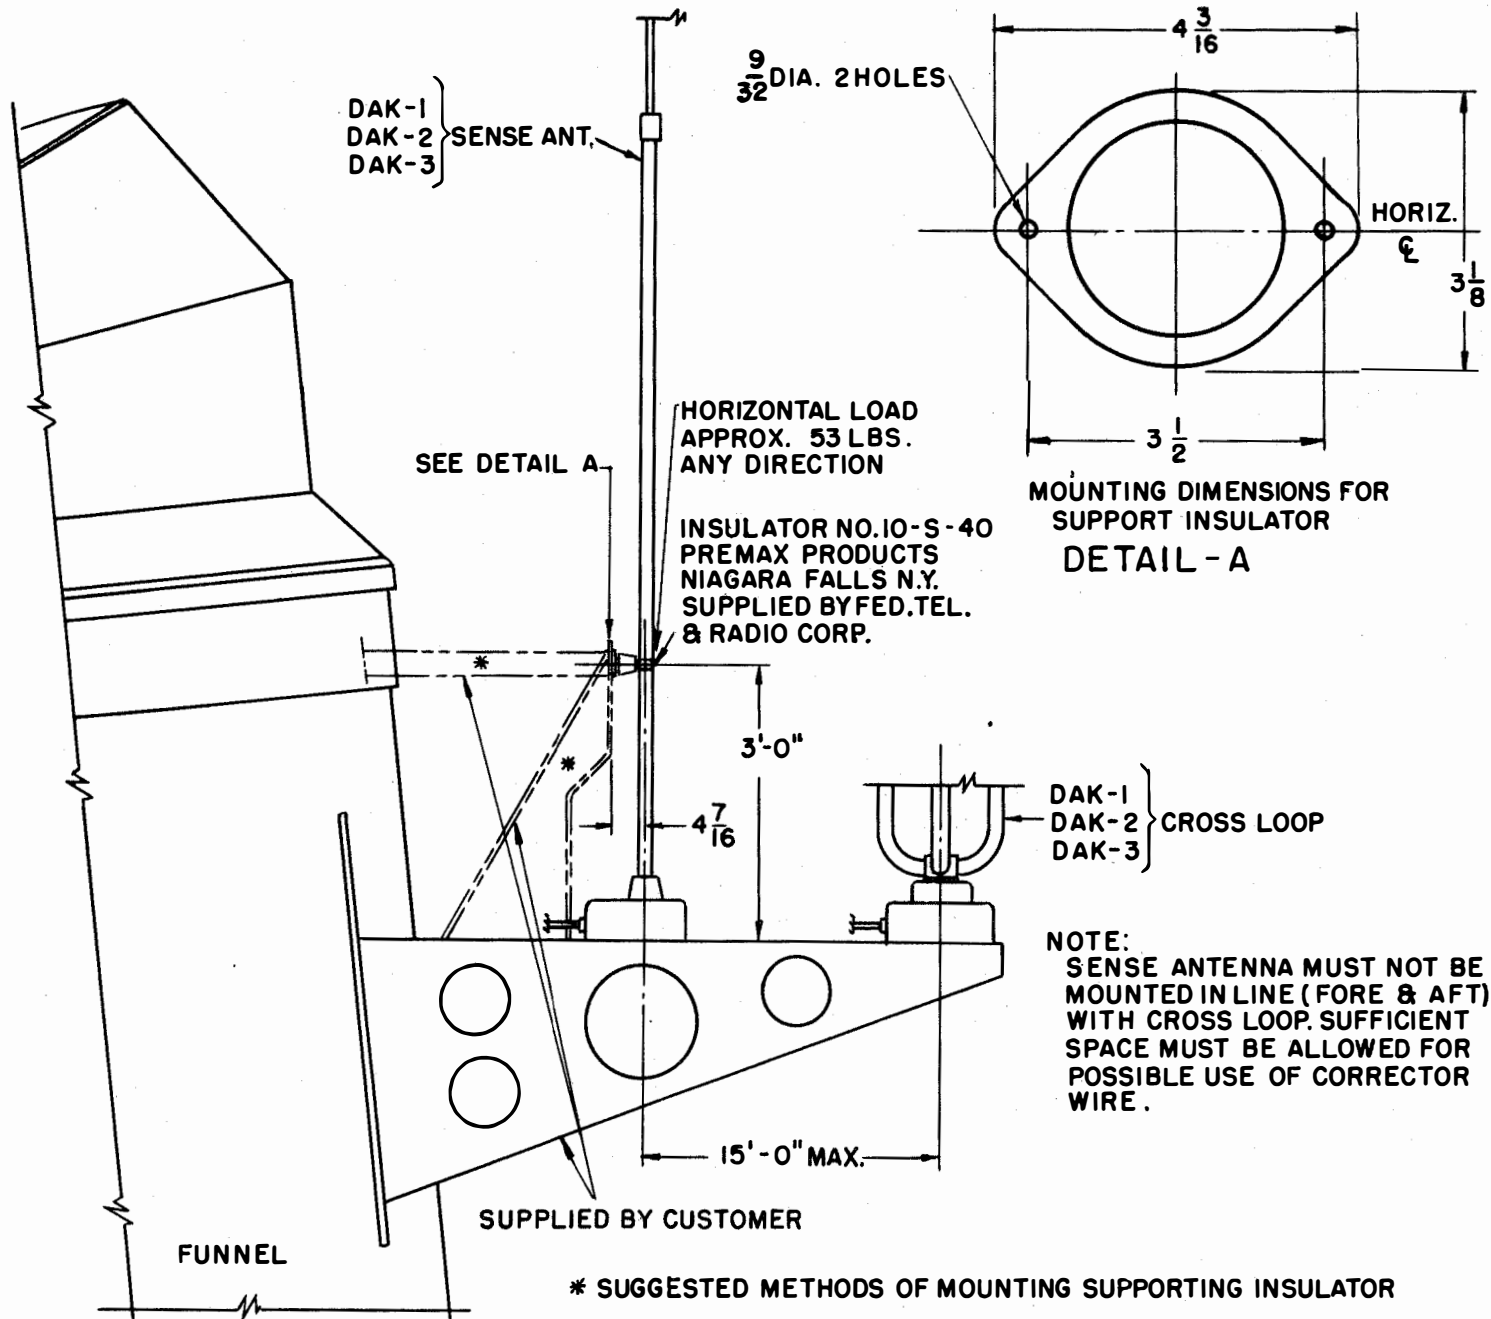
Outline drawing CFT-66093 Sense Antenna Assembly.
